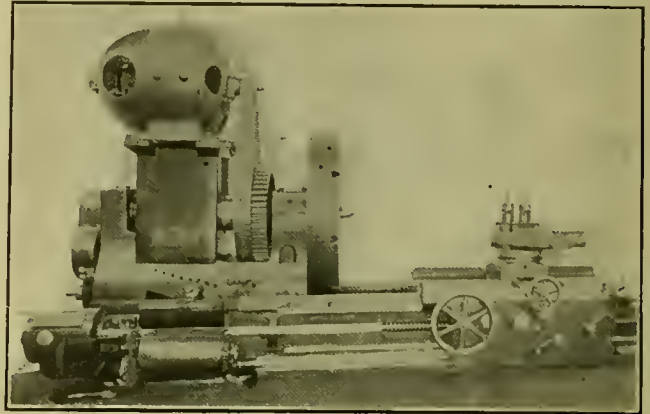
SILENT CHAIN HEADSTOCK DRIVE UPON A LODGE AND SHILLEY LATHE.—CROCKER-WHEELER VARIABLE-SPEED MOTOR.
